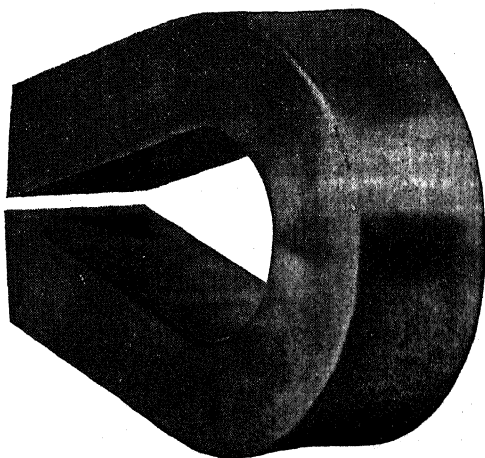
Free bend test specimen showing stretch in outer fibres of shielded arc weld.
